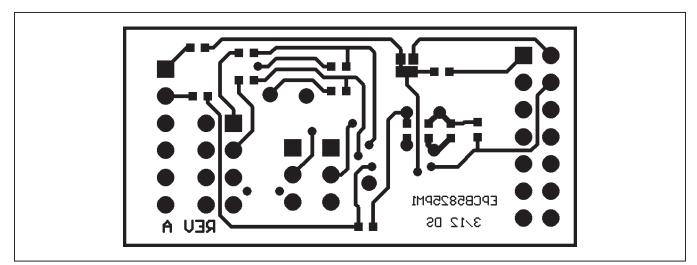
MAX5825PMB11 Peripheral Module PCB Layout—Solder Side
